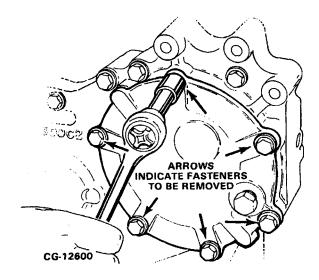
Remove Injection Pump Drive Gear Access Cover
